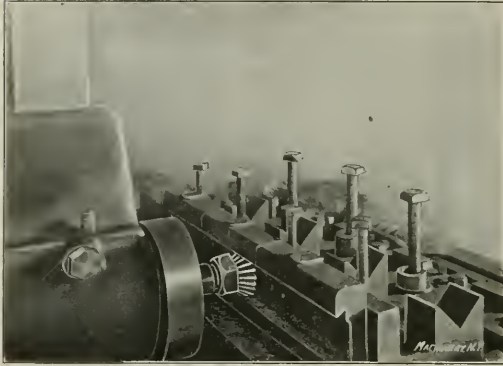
Finishing Slides by Angular Cutter on the Milling Machine.
